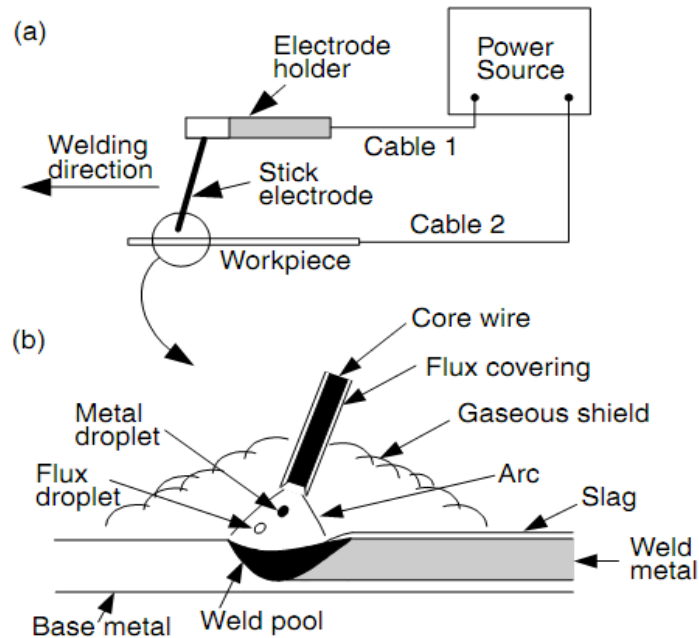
Shielded Metal Arc Welding process: (a) overview of the process; (b) the enlarged welding area [6].
